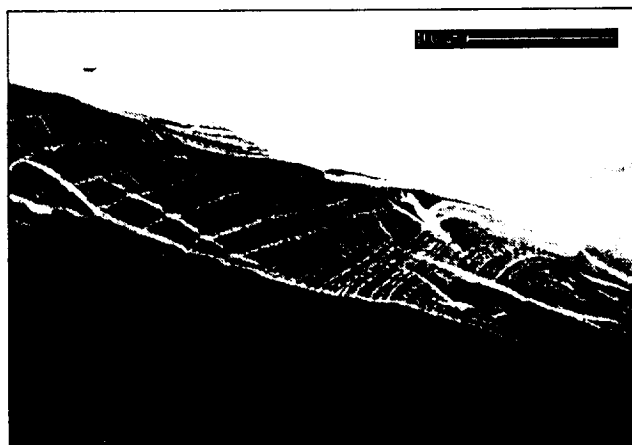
Specimen B1.6. End of crack. Secondary cracks associated with main crack striations are apparent. Plastic deformation at the extreme right was created during SEM specimen preparation.
